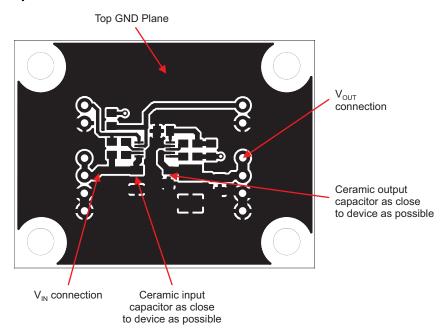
Recommended PCB Layout for TPS6050x (Top Layer)
